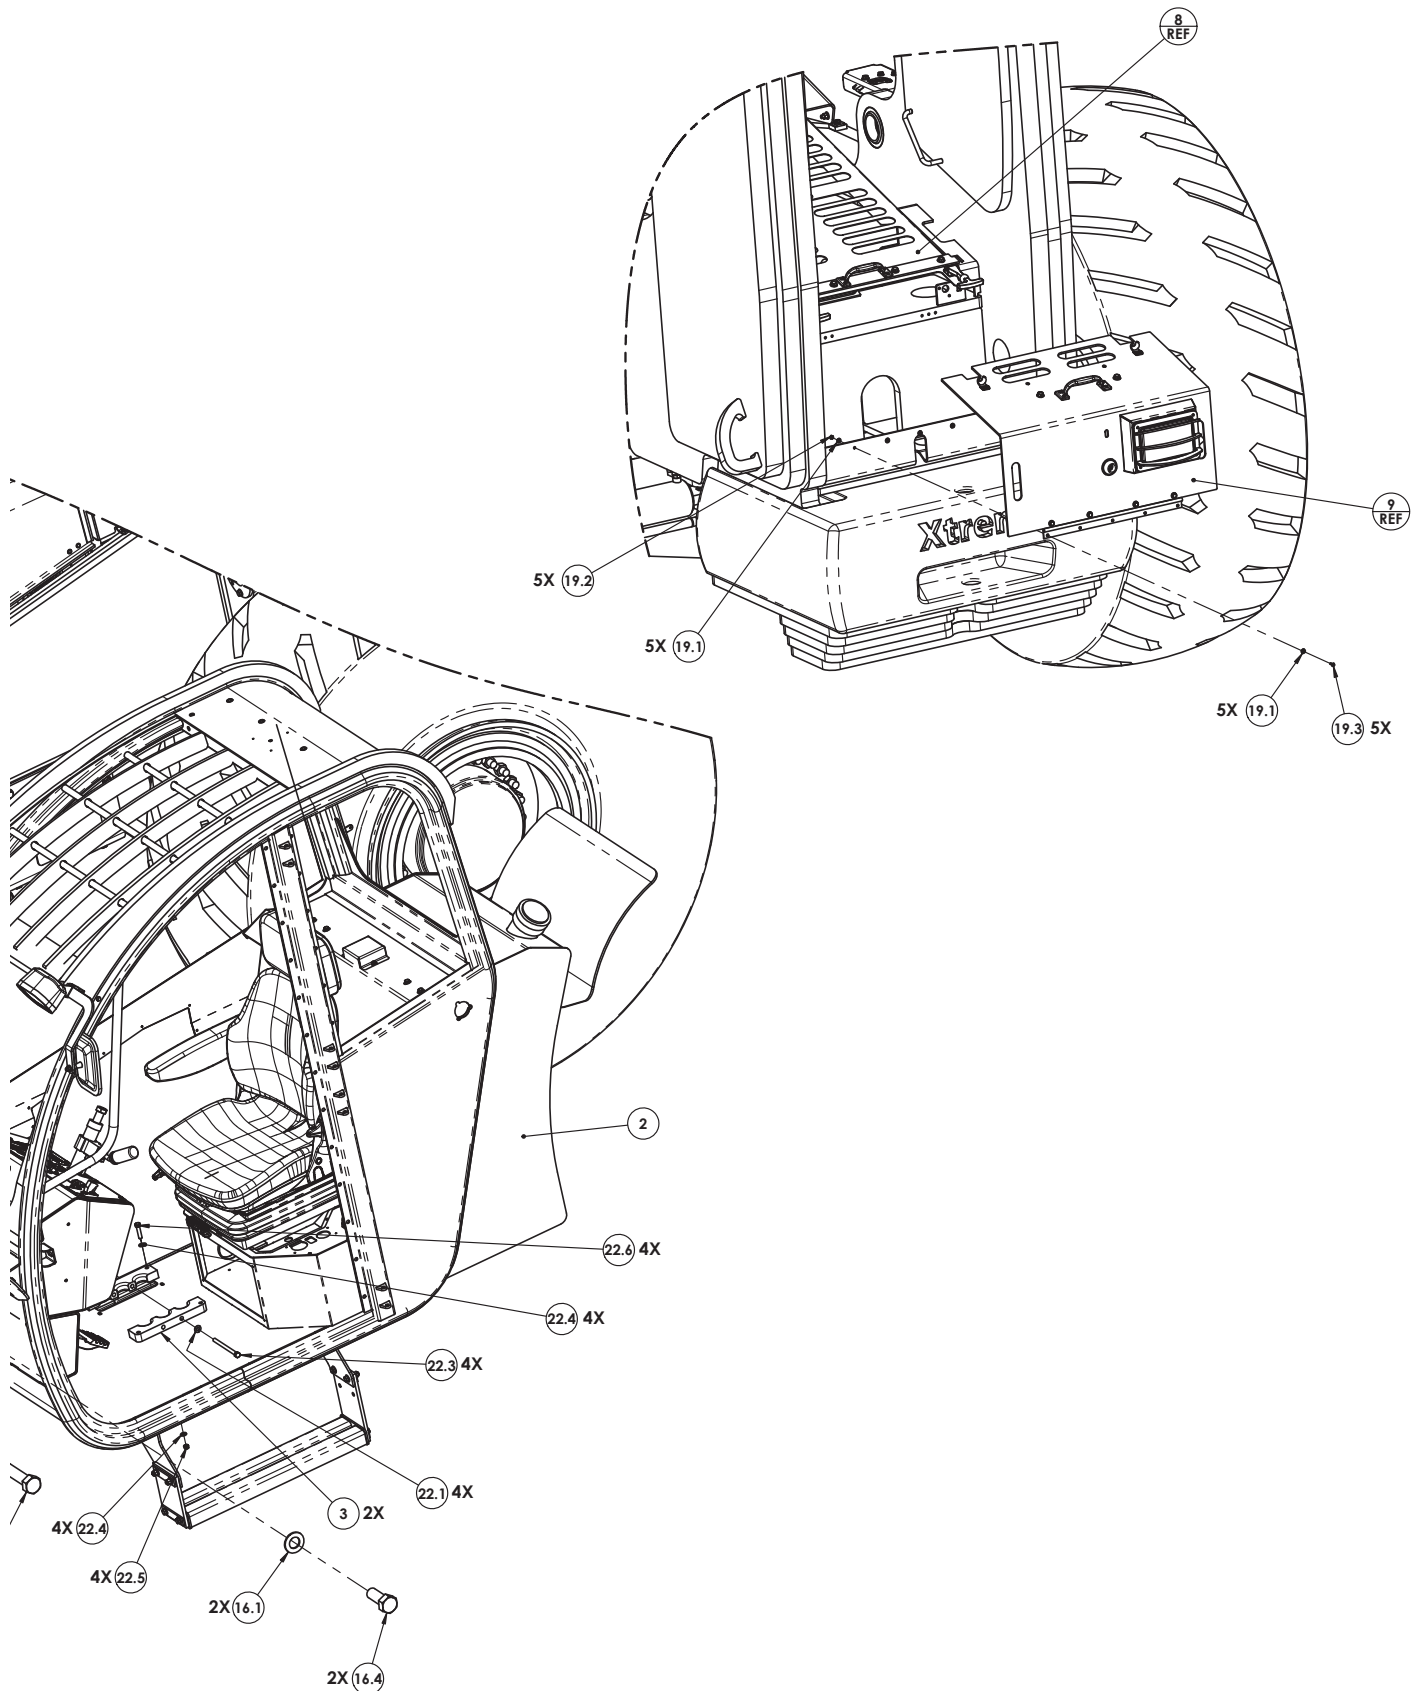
CHASSIS ASSEMBLY - CAB & COVERS (32002-000)
